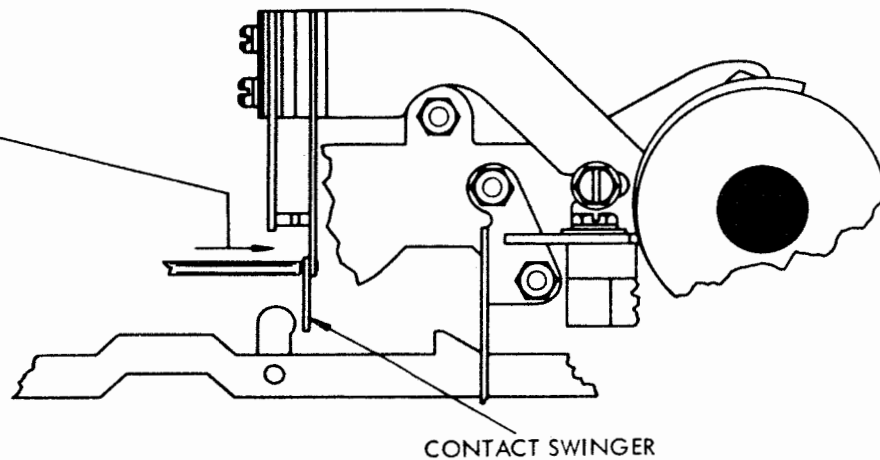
Q. KEYBOARD TT-371/UG, SYNCHRONOUS PULSE CONDITIONING CONTACT
